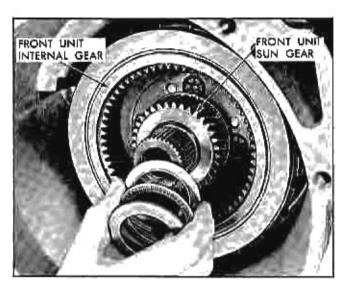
Installing Thrust Bearing and Races on Front Sun Geor
